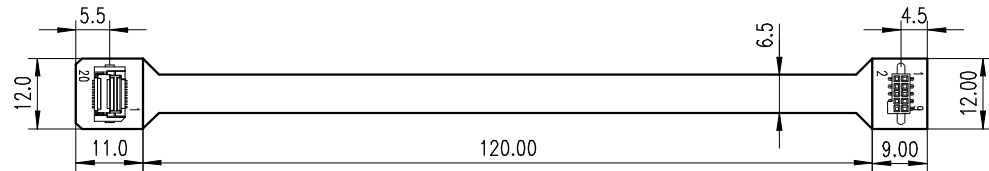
ECU Adapter ETAM8 (Bottom View)
